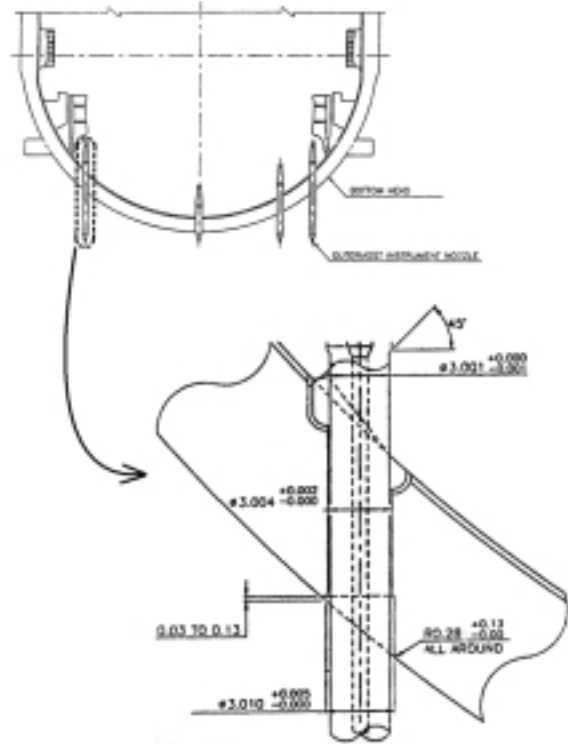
Nozzle weld region of RPV lower head for KSNPP (dimension in inch).
